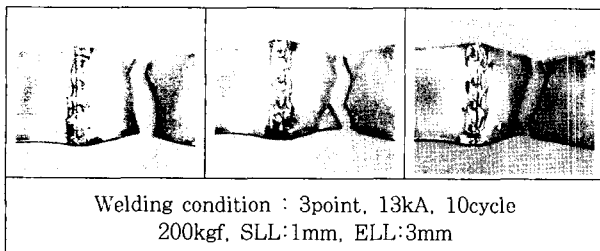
Fracture shape of FEC mash seam welded joint
